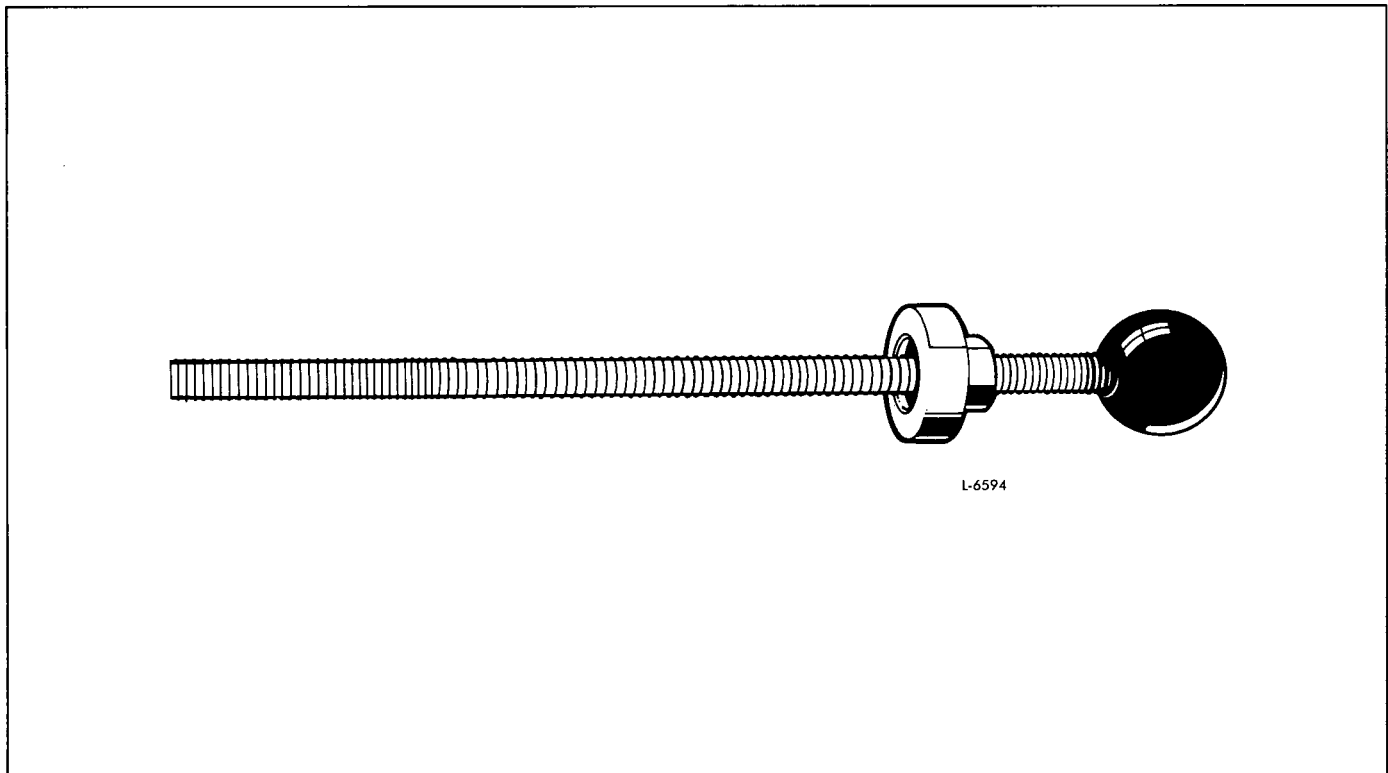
Bypass Valve Assembly/Disassembly Tool J-37466
